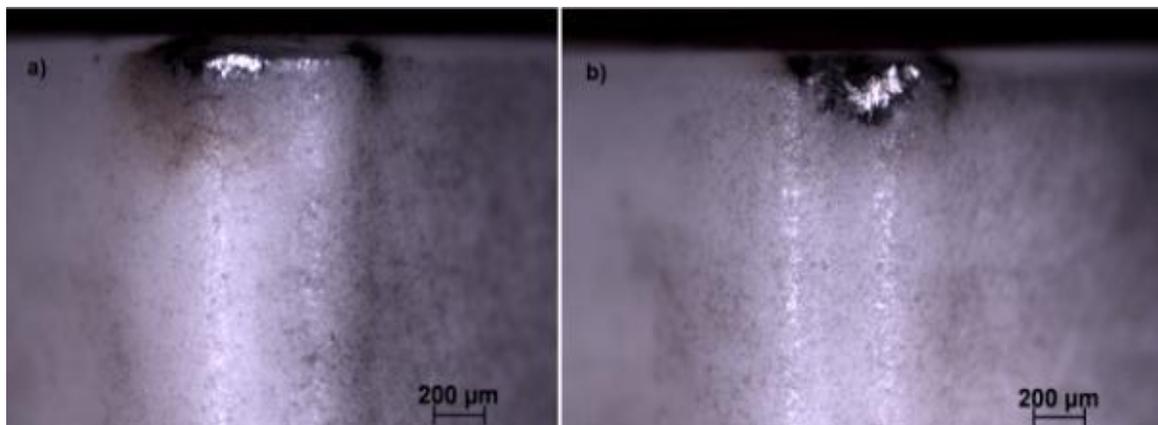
Abrasive wear a) For cutting speed ( $V_c$ )= $200\text{m/min}$ , feed rate ( $f$ )= $0,05\text{mm/rot}$  and cutting depth ( $a_p$ )= $0,15\text{mm}$ . b) For cutting speed ( $V_c$ )= $200\text{m/min}$ , feed rate ( $f$ )= $0,15\text{mm/rot}$  and cutting depth ( $a_p$ )= $0,15\text{mm}$ .
